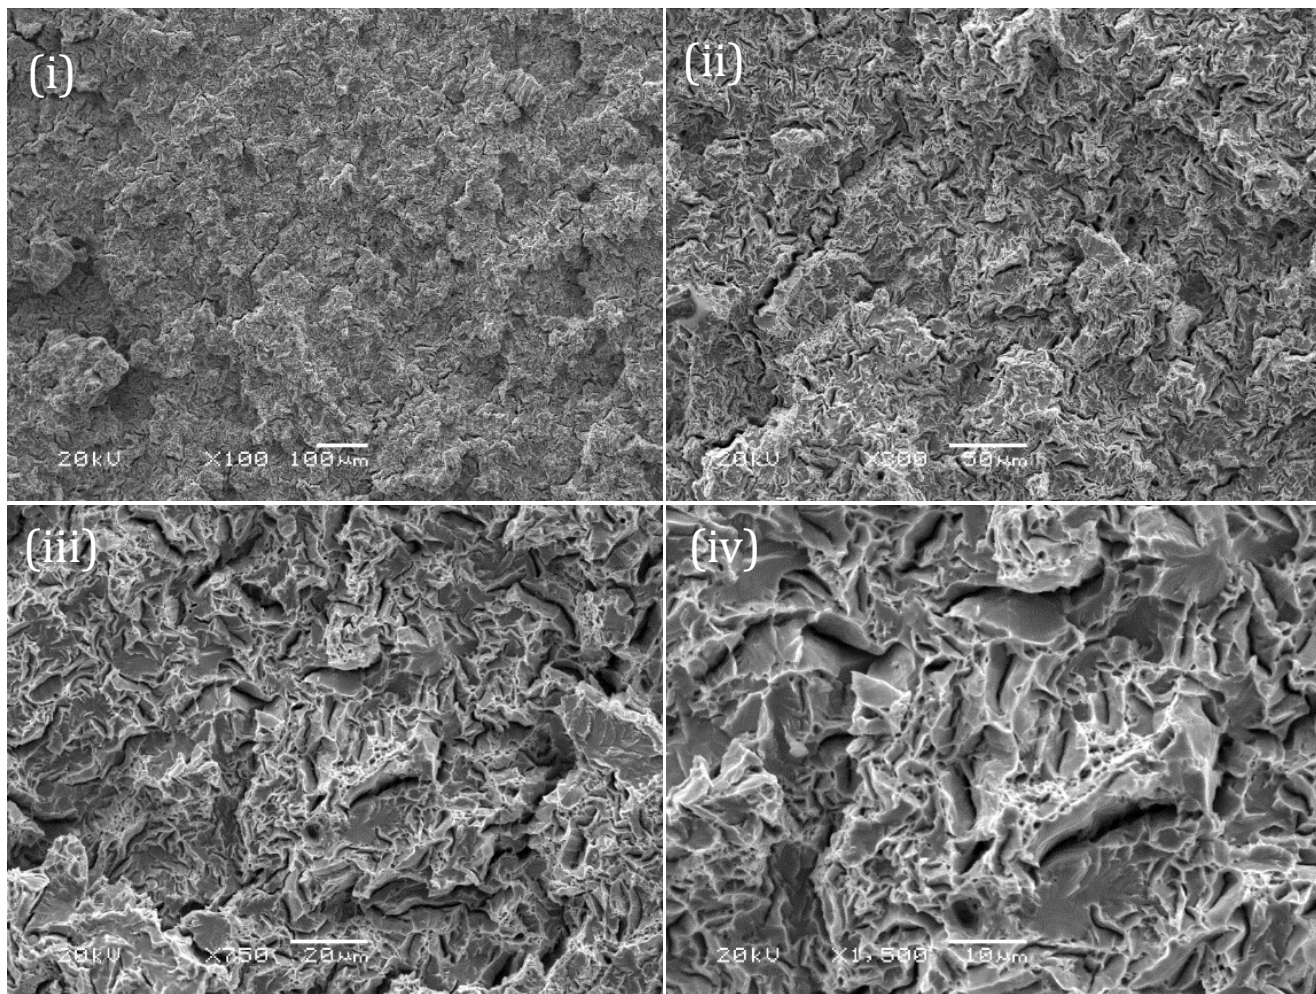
Fracture surface morphology of Tensile specimen HT1-01 tested at -196°C; (i), (ii), (iii) and (v) are sequence magnification of the same typical area.
